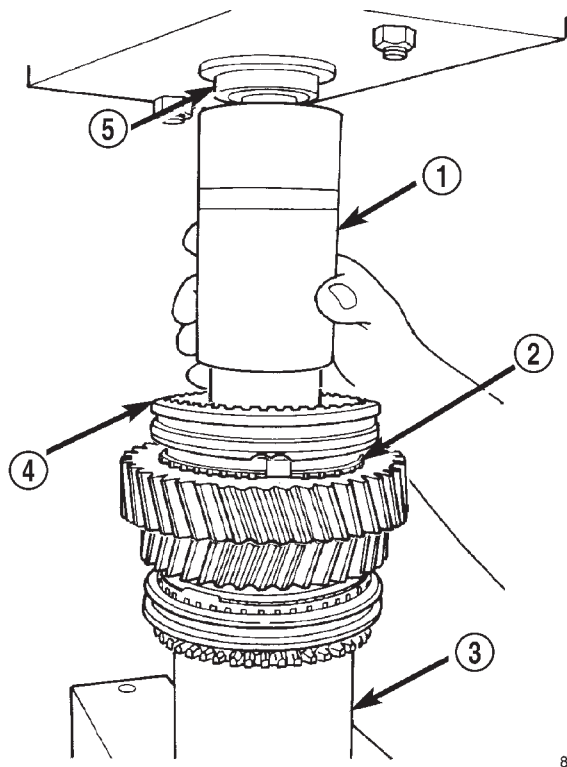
Pressing 1-2 Synchro Assembly Onto Output Shaft
